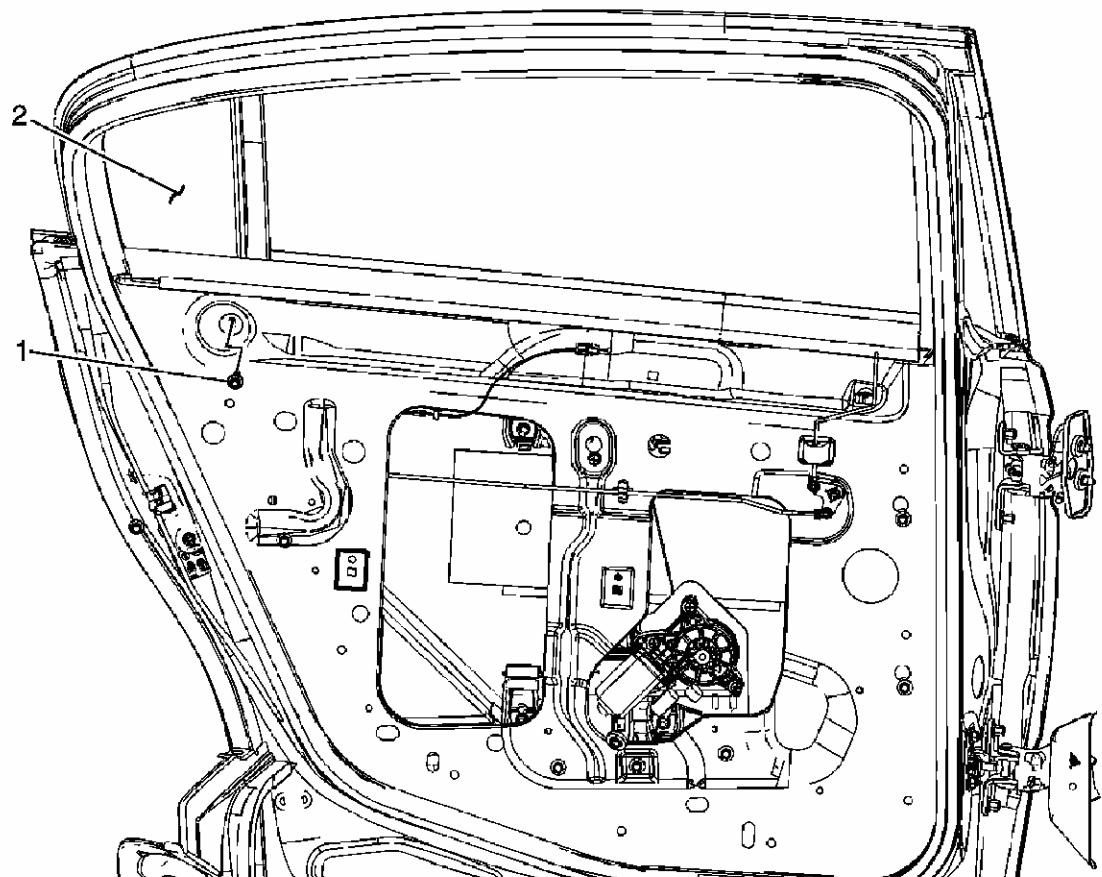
View Of Rear Side Door Stationary Window & Front Channel
